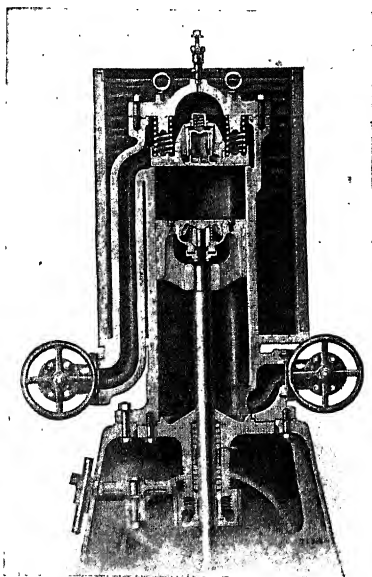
CYLINDER OF COMPRESSION REFRIGERATING MACHINE, SHOWING ONE METHOD OF ELIMINATING CLEARANCE.
